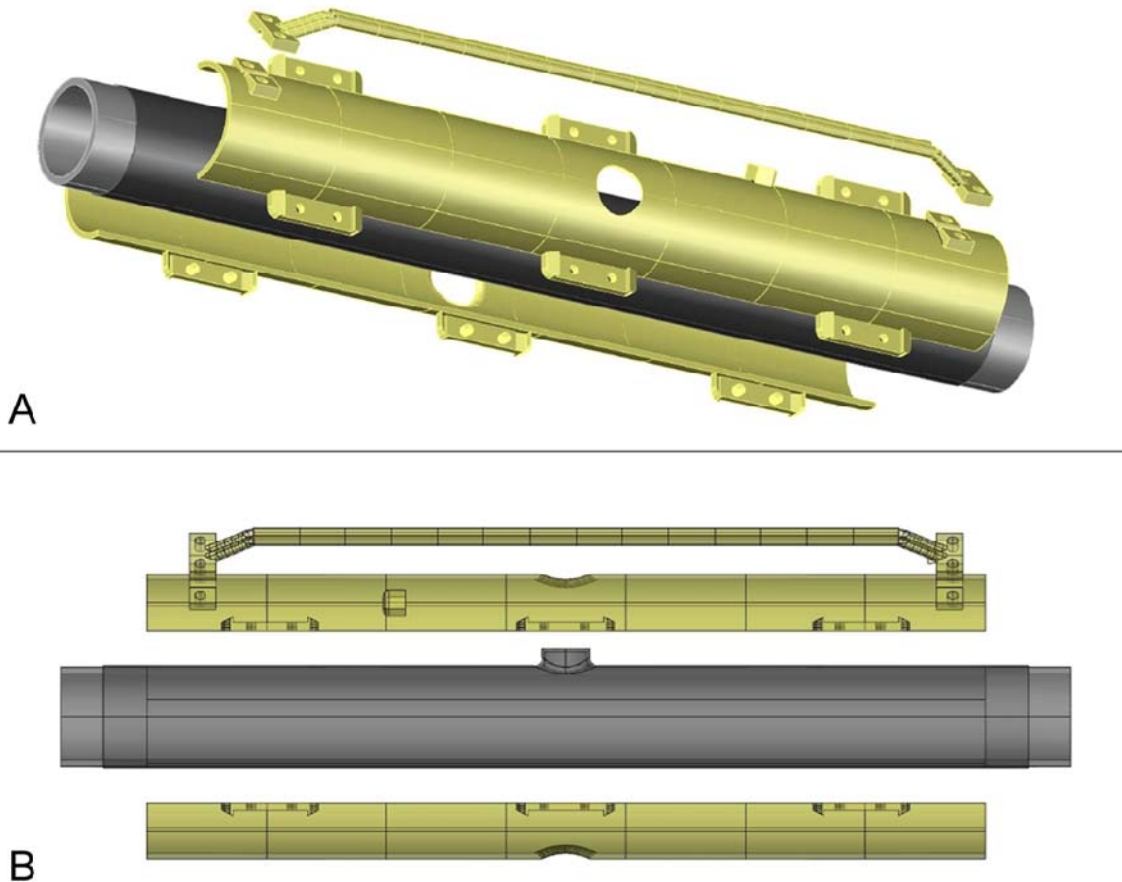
Proposed electrode design to prevent the electrode from moving upon well completion and keeping the electrode completely isolated from the steel well casing: (A) isometric view and (B) side view of assembly.
